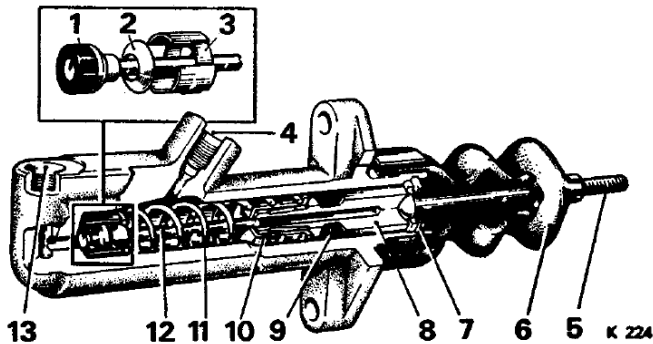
CUT-AWAY VIEW—BRAKE MASTER CYLINDER
